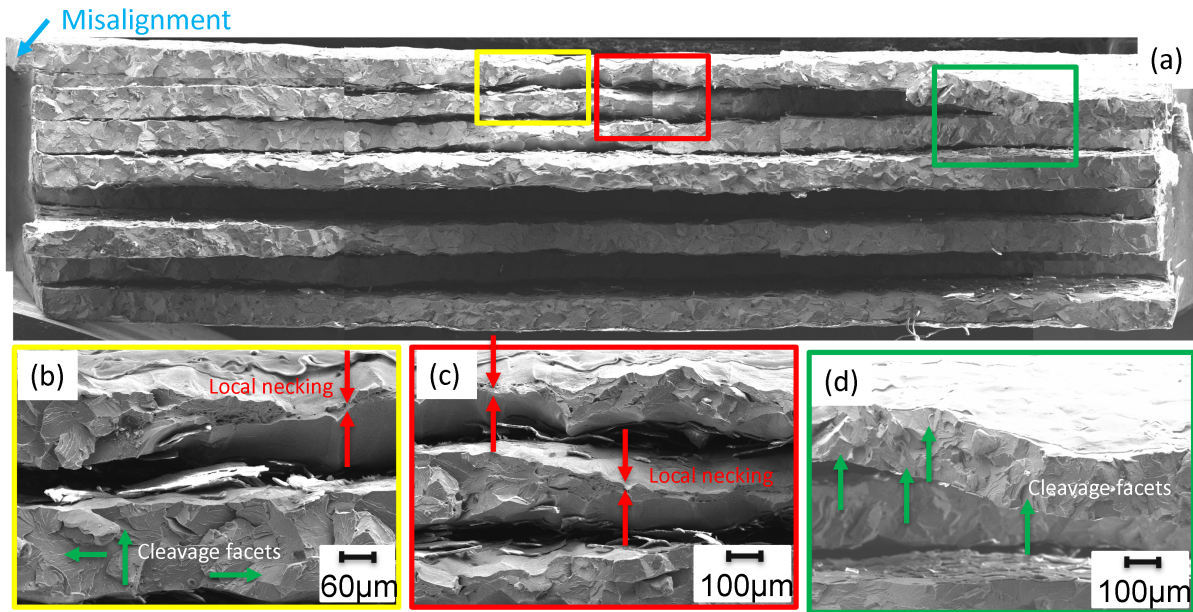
Fracture surface laminated quasi-static sample room temperature, (a) overall sample (b) cleavage facets and local necking (c) local necking (d) bending and cleavage facets
